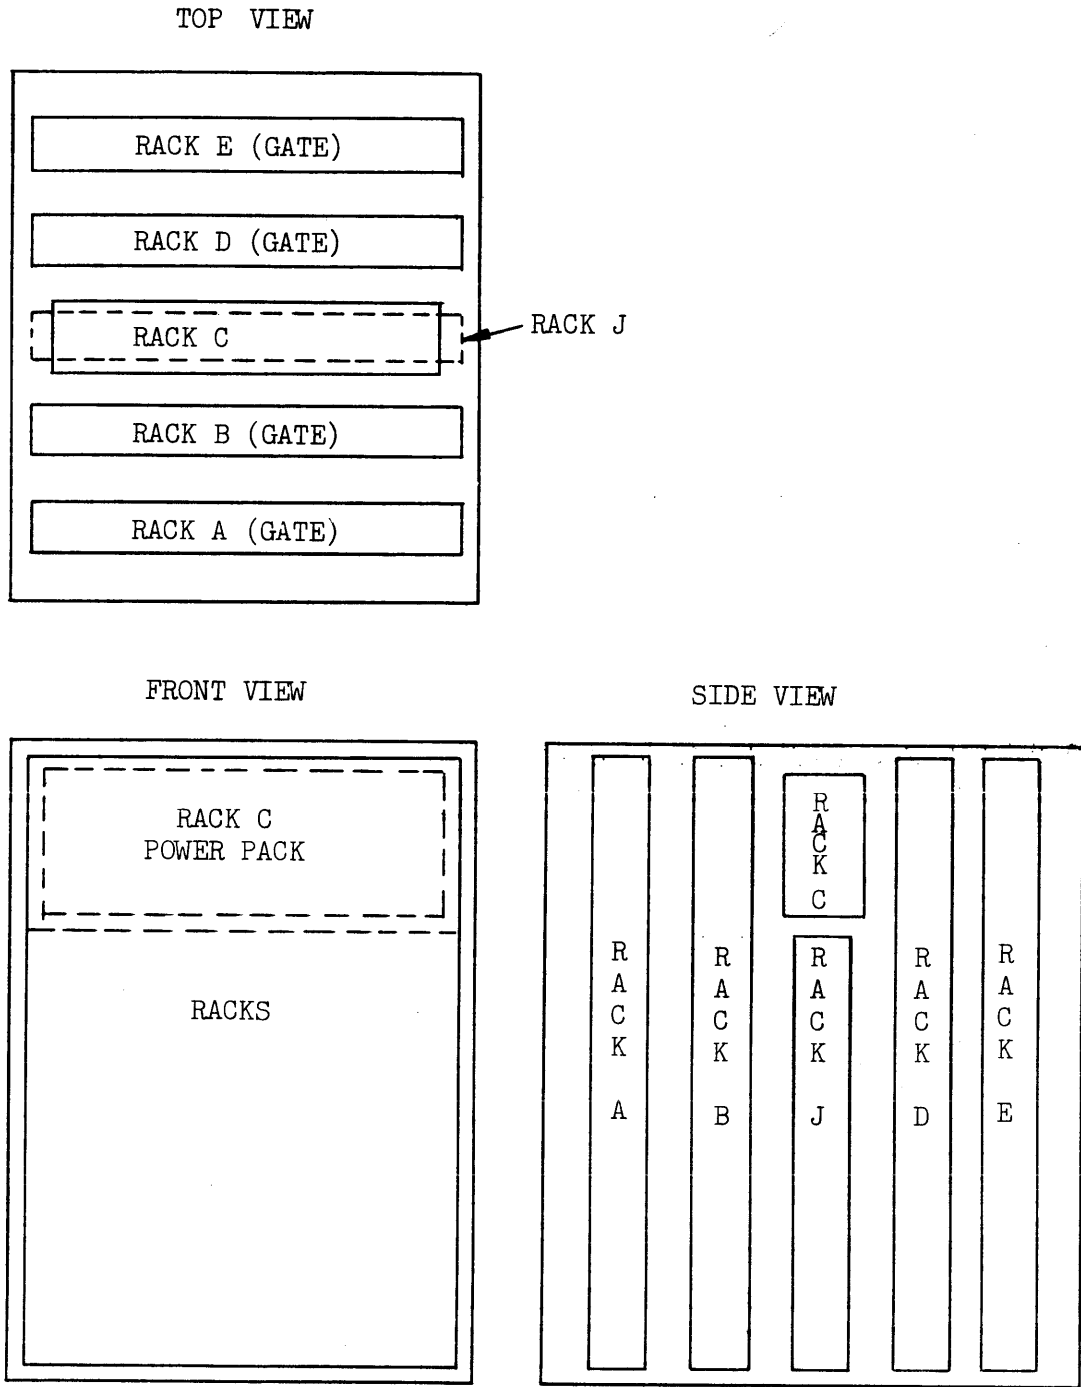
PROCESSOR RACK LAYOUT
